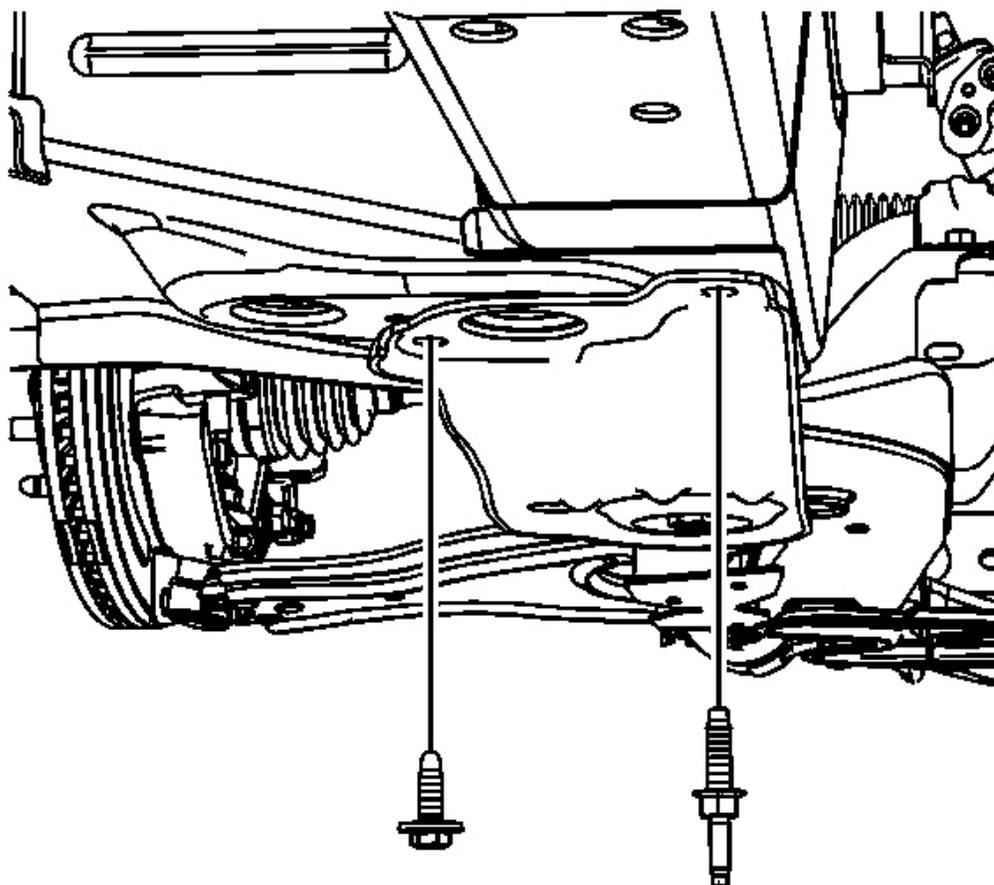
Identifying Frame Reinforcement Mounting Bolts
